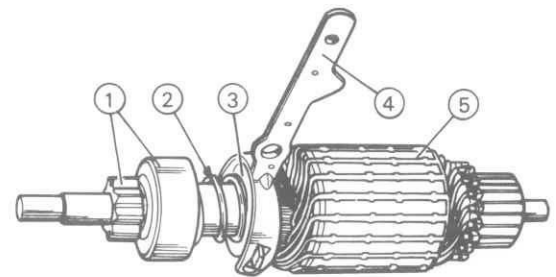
5 The starter motor armature assembly showing over-running clutch and shifter lever
